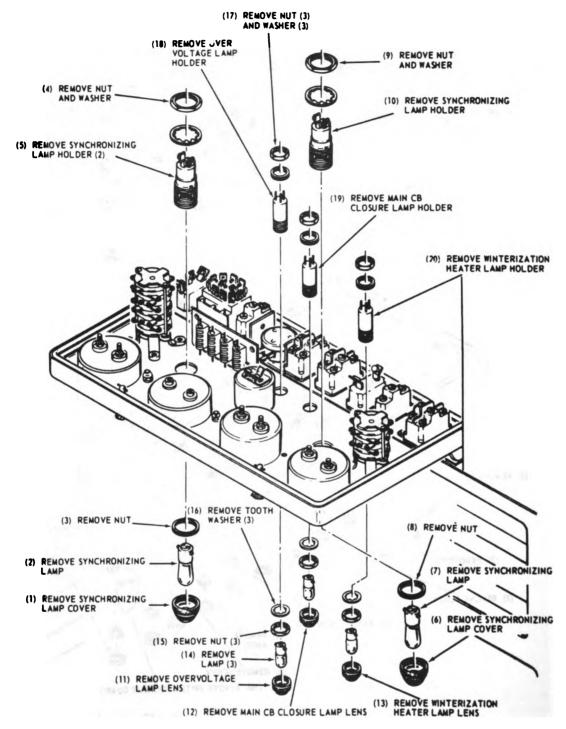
Electrical controls instruments panel assembly indicator lights, lamp holders, removal and installation.
